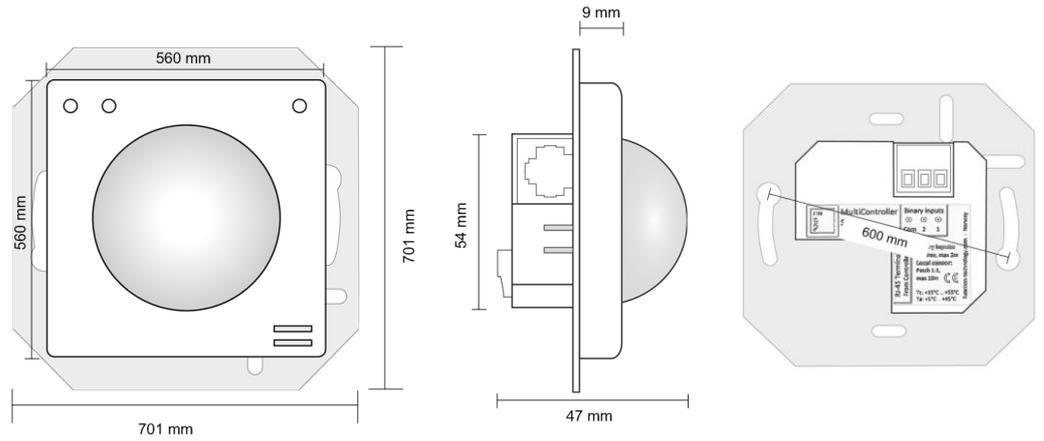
Mechanical dimensions of the sensor (71 x 71 x 47 mm)
